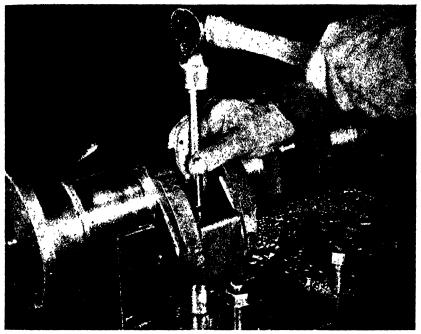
Drilling oilholes in a Crankshaft (3) Hammering the centre punch through a template hole. (A.E.C., Ltd.)
